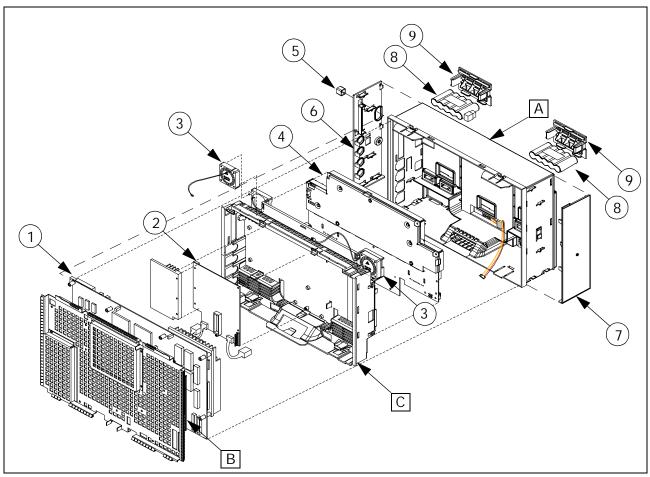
Rear Housing Subassembly - Replaceable Subassemblies
